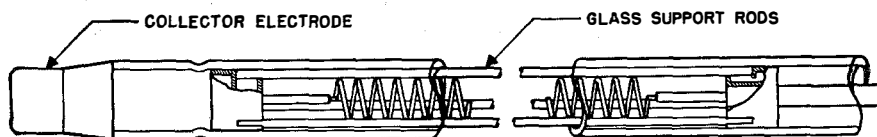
Mounting of the helix in the 6-to-8-centimetre amplifier tube.
